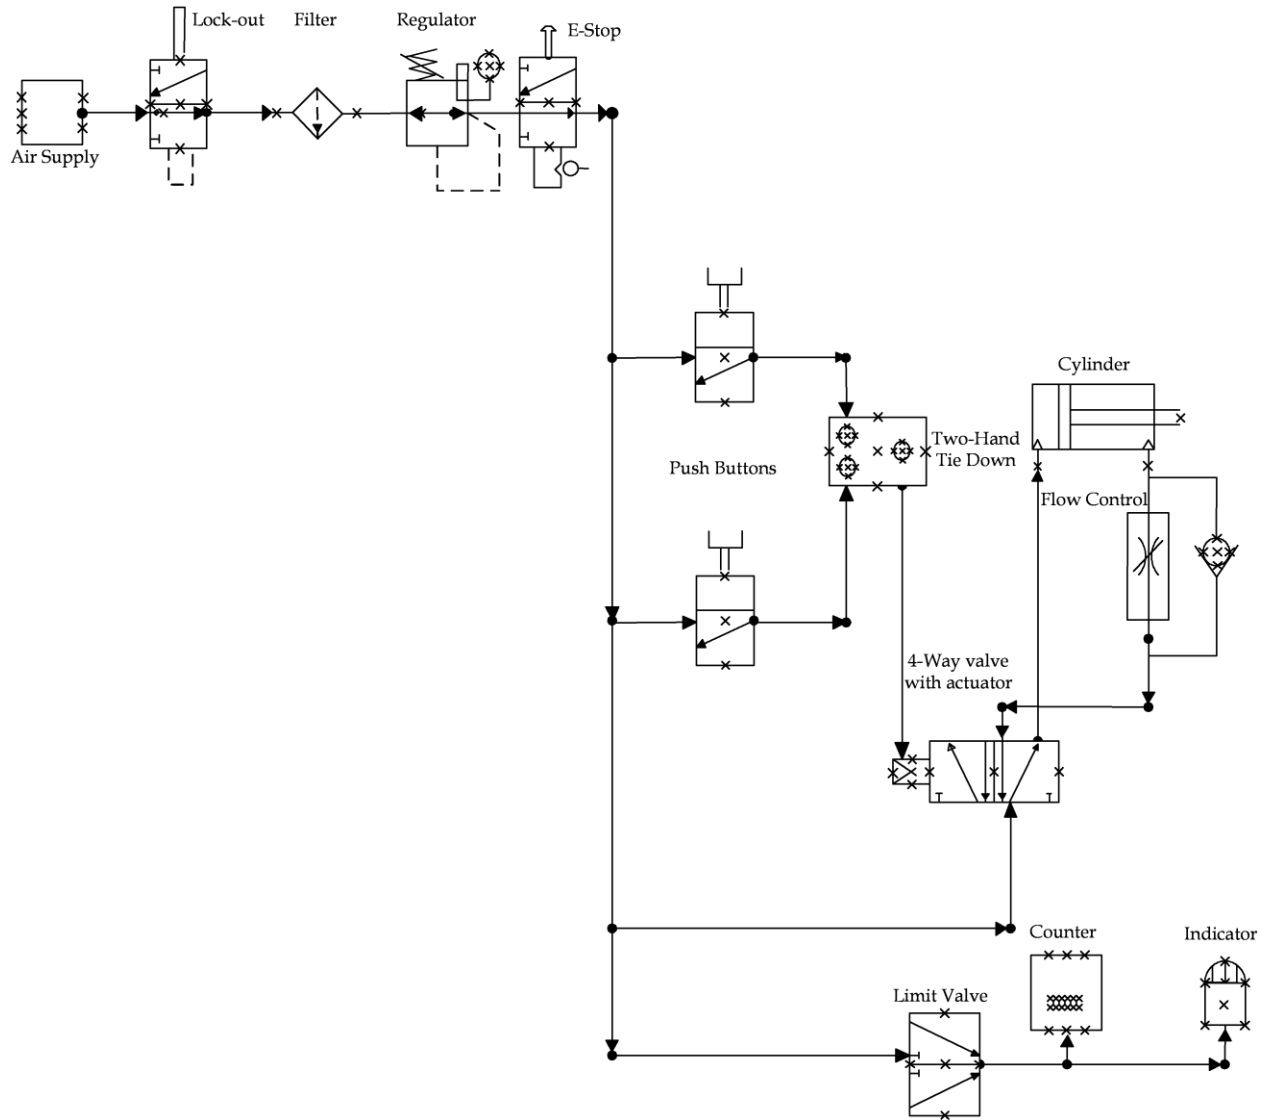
Pneumatic Schematic for Automatic Wash Bottle Assembly System.
